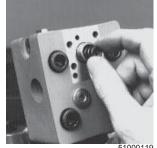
Install HC Control Start Adjuster Spring
